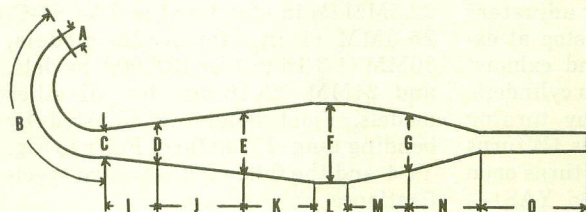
An expansion chamber constructed to this set of specifications will produce a high RPM (peaky) performing engine.
